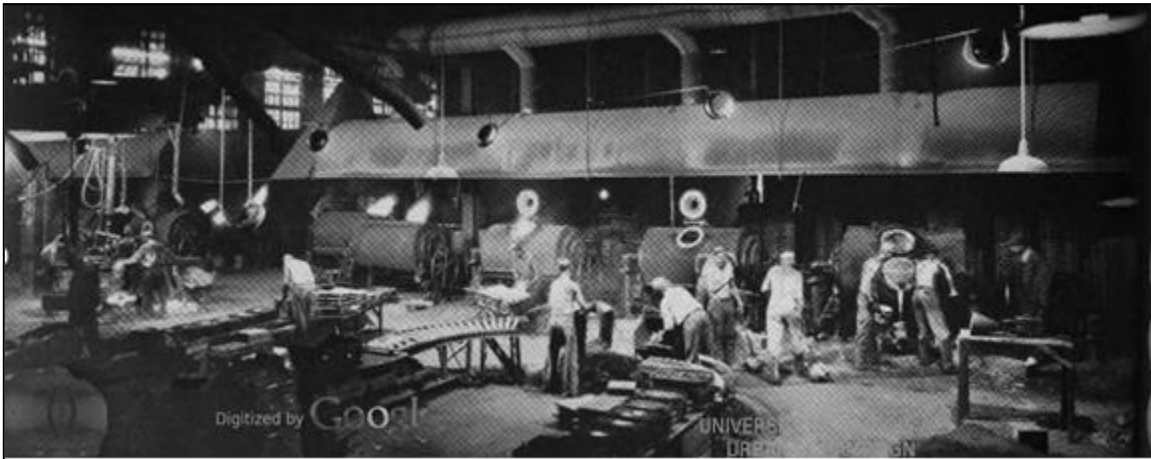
Foundry workers working at Maytag Plant No. 1; labelled “pre war foundry” possibly Building 13 or Building 14, both non-extant or at the satellite foundry at the intersection of 1st Ave E and E 12th St S (Maytag Company 1945:18).
